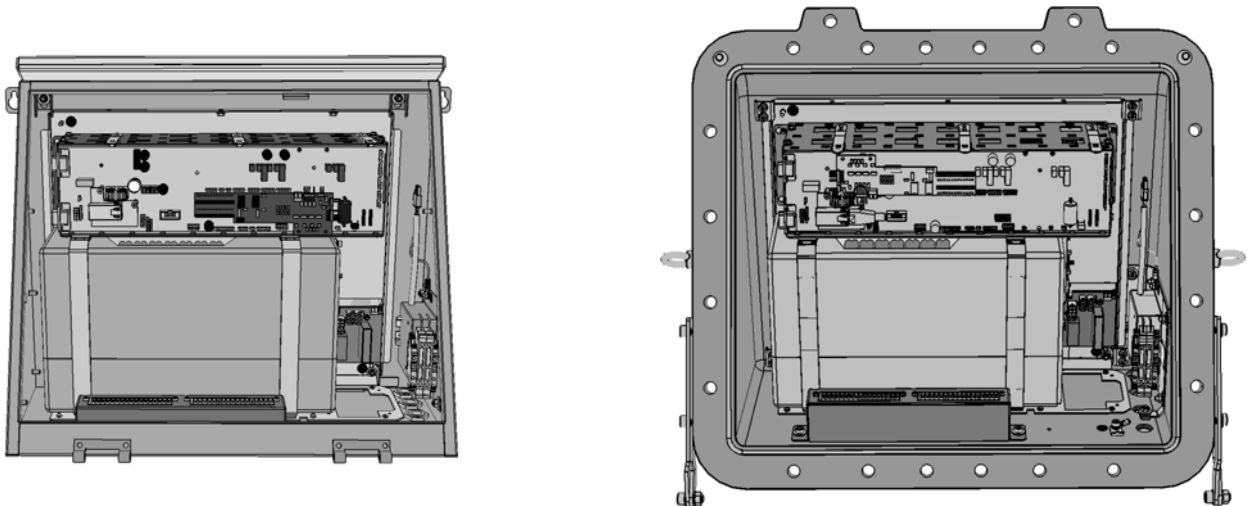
X-STREAM F AND FD - Interior views (shown without front doors)
